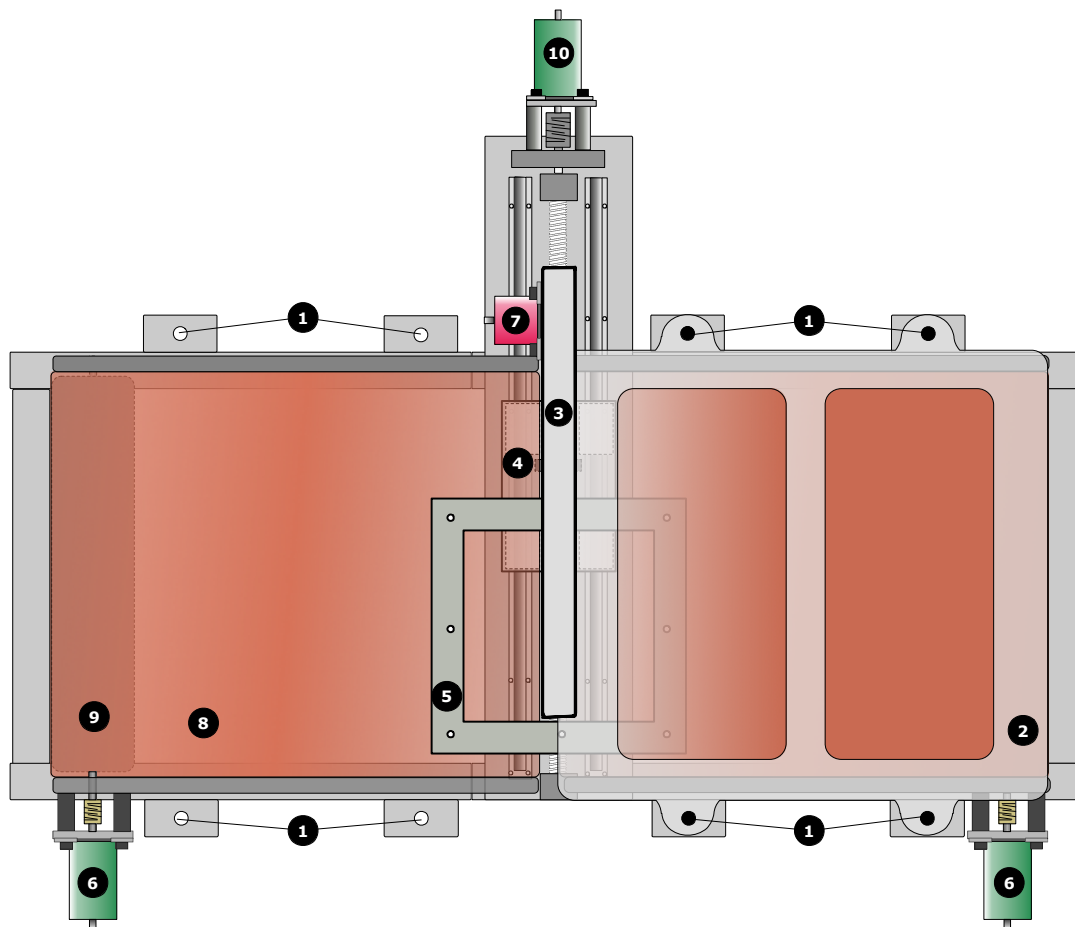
Top view of the CSM shown with top-left conveyor removed and top-right conveyor semi-transparent; ① alignment screws, ② X axis top-right conveyor chassis, ③ stitching head, ④ Y axis stitching head carriage, ⑤ preform/frame, ⑥ X axis conveyor steppers, ⑦ Z axis stitching head stepper, ⑧ X axis bottom-left conveyor, ⑨ X axis bottom-left conveyor drive roller, ⑩ Y axis carriage stepper.
